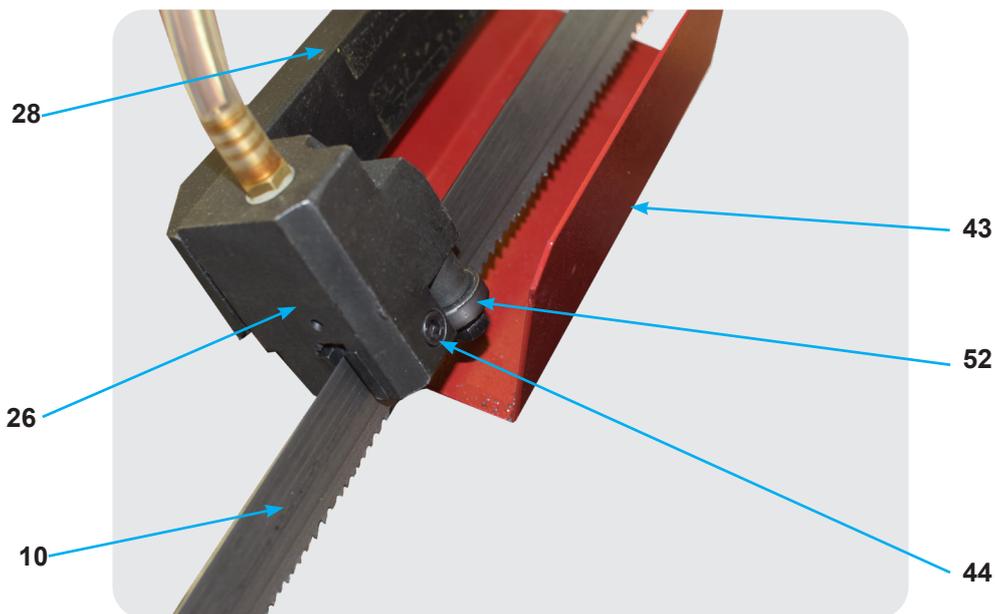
SIDE BEARINGS ADJUSTMENT
